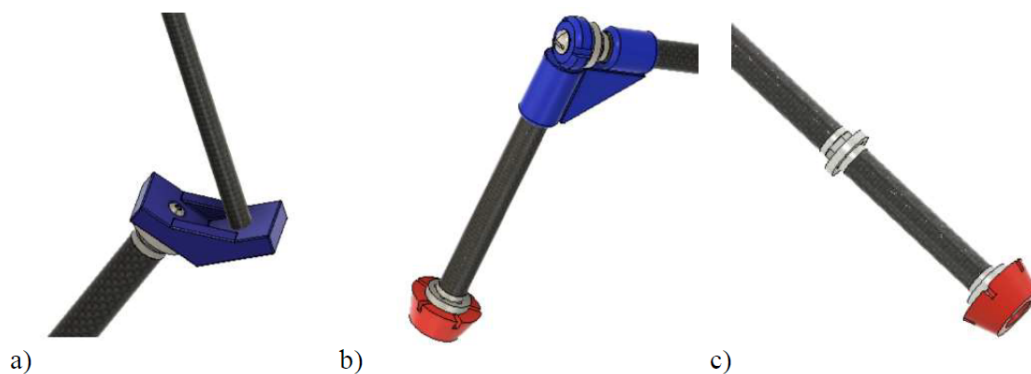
Detail CAD views of a) cone rod bracket, b) perpendicular leg extension, and c) in-line leg extension
